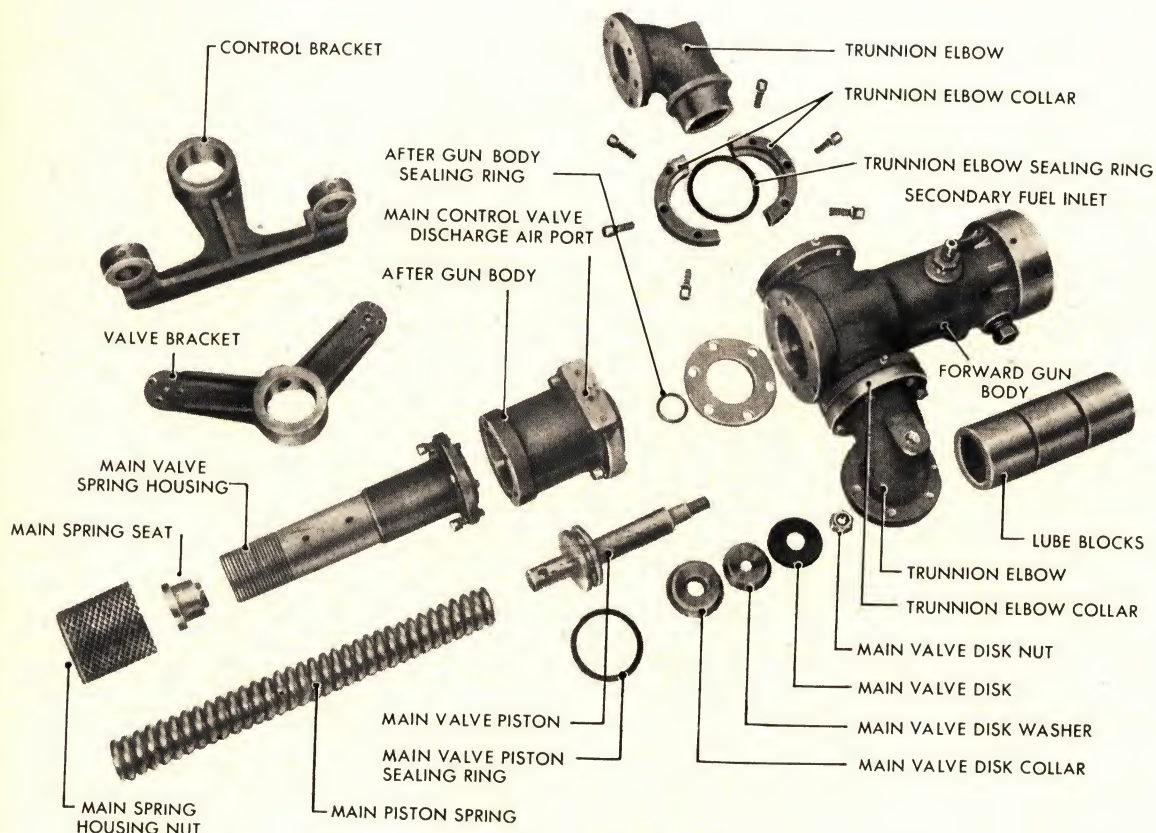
Flame Thrower Mk 1—Gun Body Disassembled
